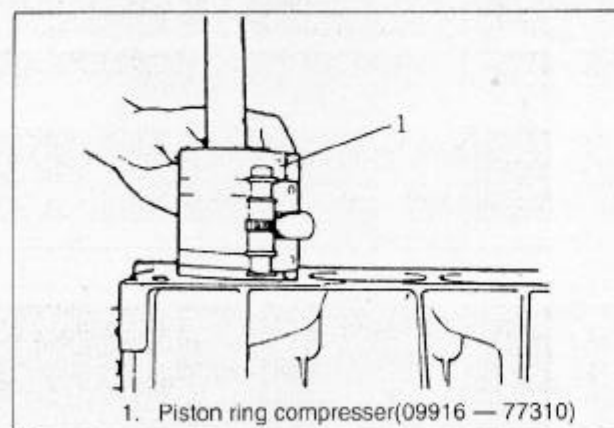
A — 89 INSERTION OF PISTON INTO CYLINDER
